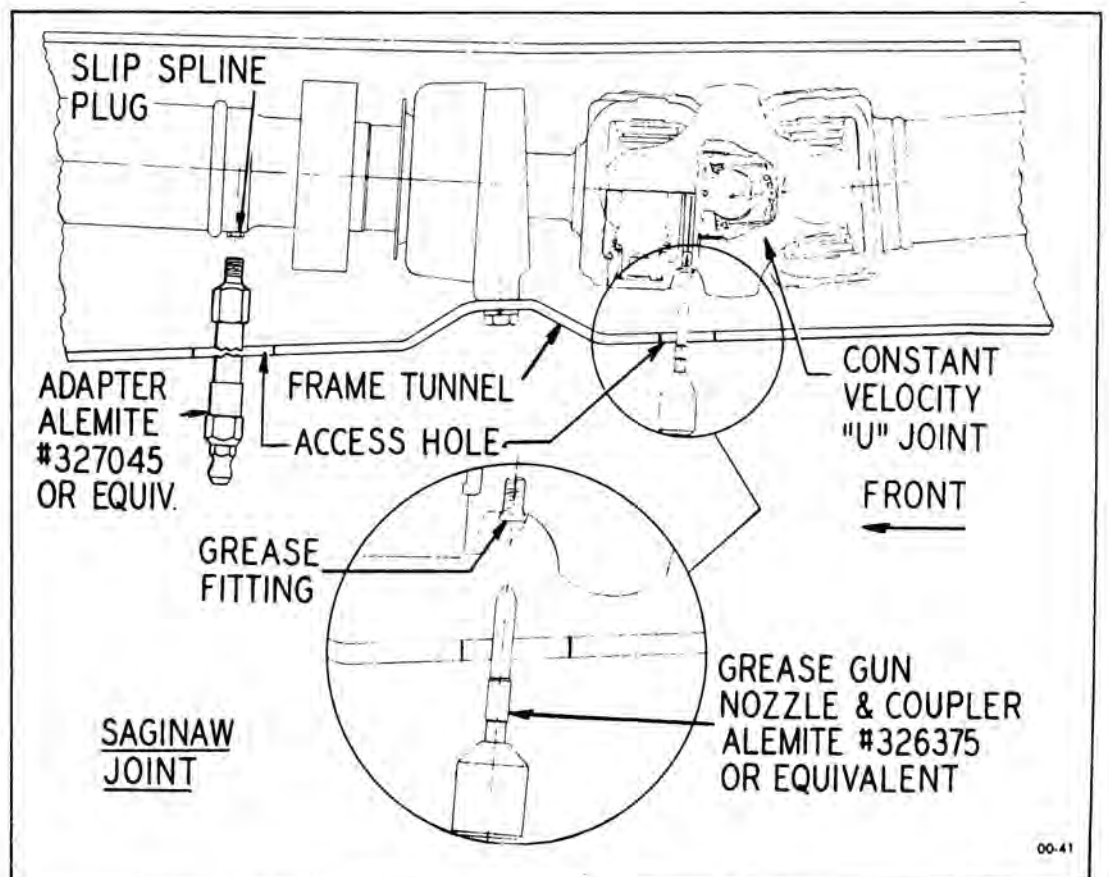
Propeller Shaft Lubrication Points (49000 Series)
